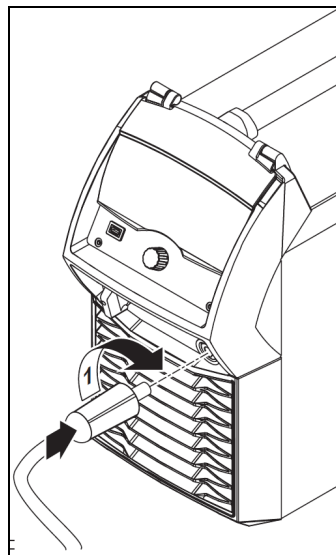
(b) Connection of welding power supply (2/2)
